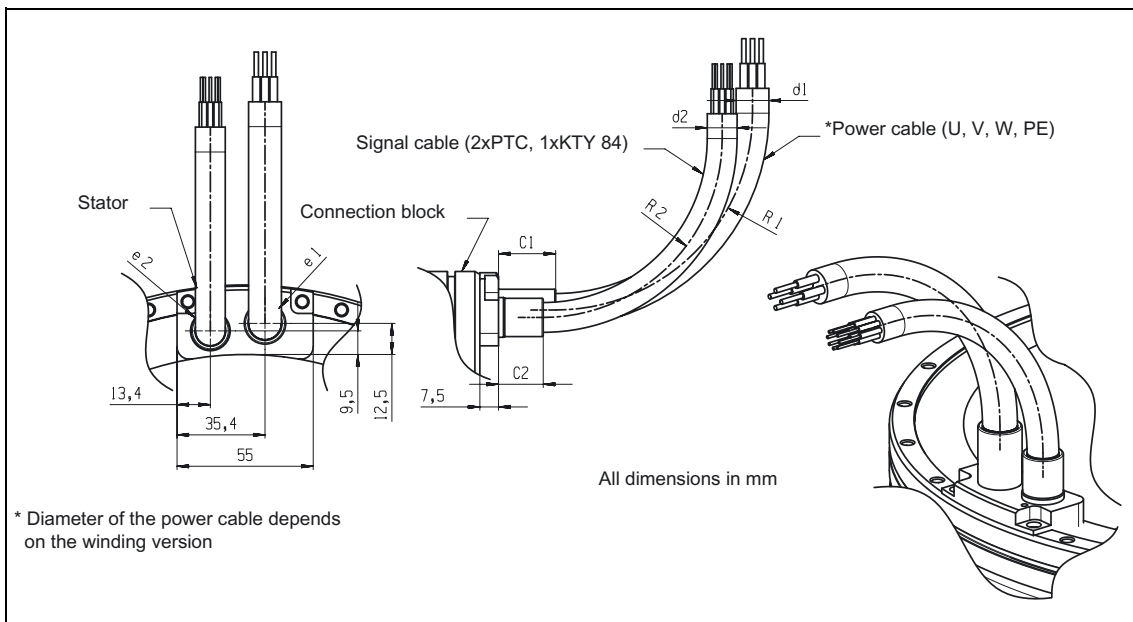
Axial electrical connection with sleeve for 1FW6130 (motor type B)
